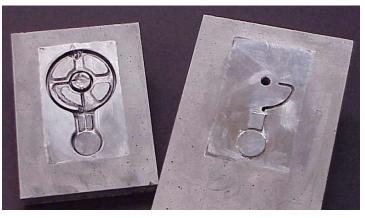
Mold constructed using metal arc spray and aluminum-filled epoxy.
